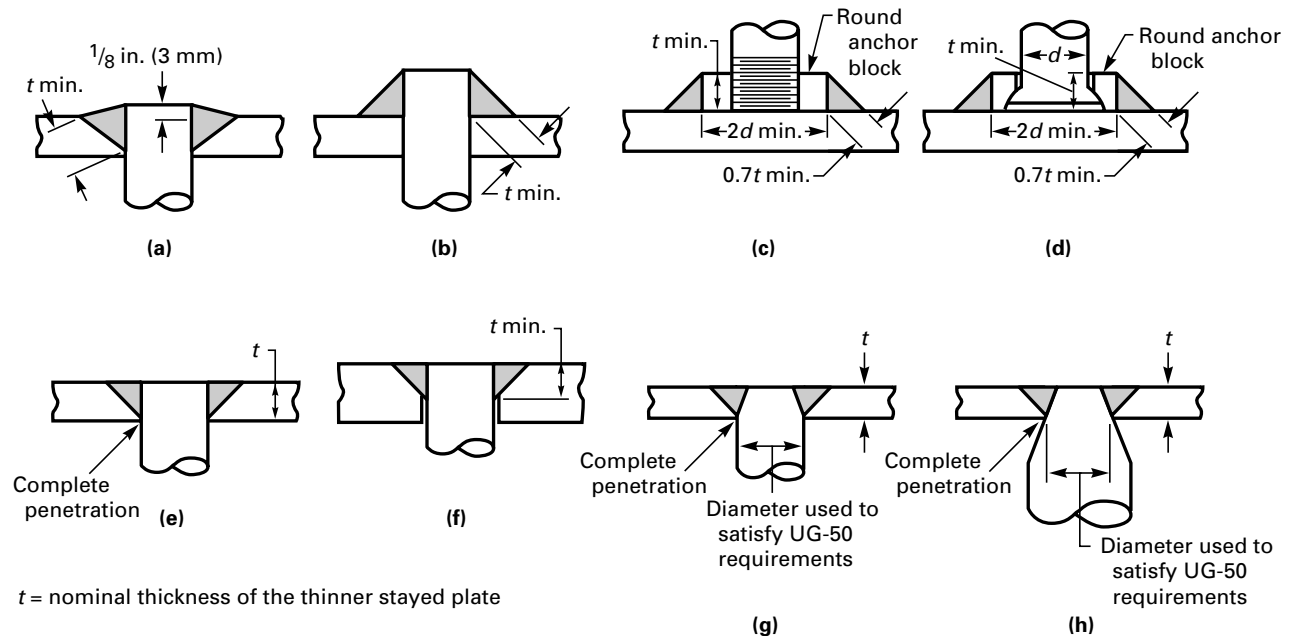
TYPICAL FORMS OF WELDED STAYBOLTS
